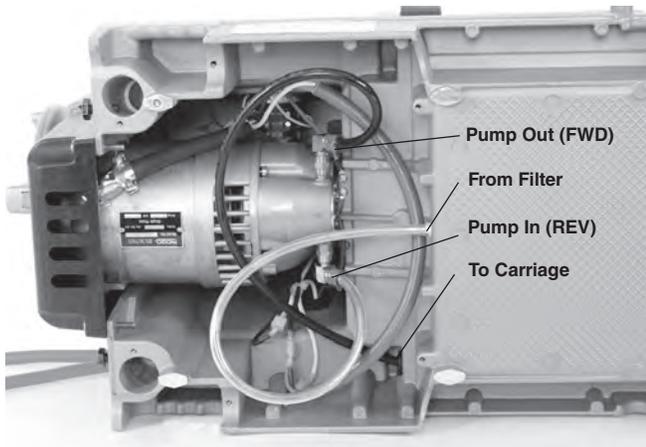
B – Oil Pump Connections for Right Hand Threading (Switch in FWD)
